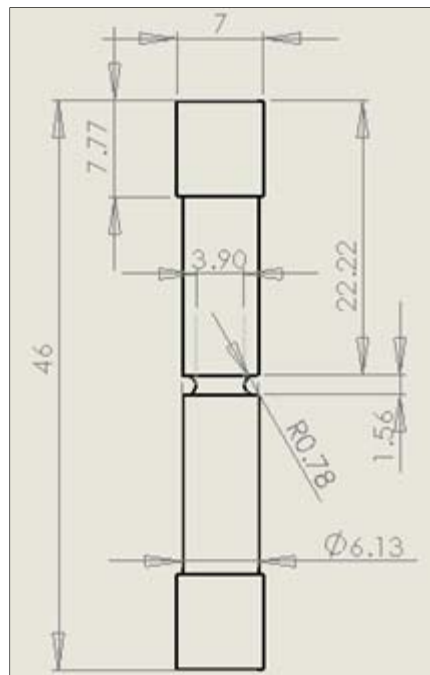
A schematic showing the dimensions of the sharp notched bar samples machined from 7 mm diameter cylinders.
